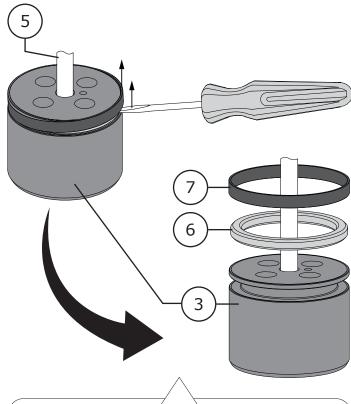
Two-Piece Plug Seal Ring Removal (Model 360)
